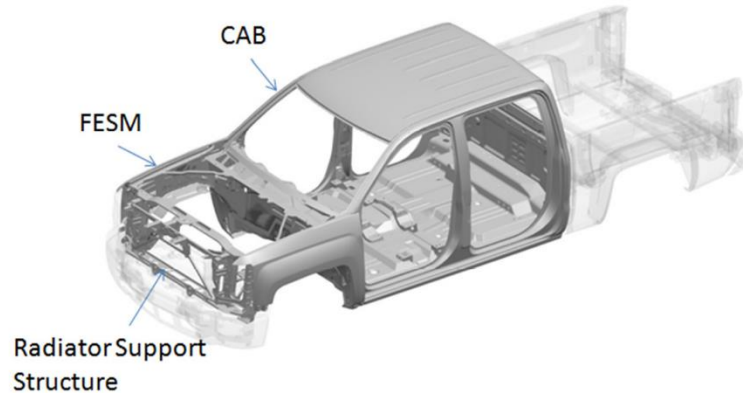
Baseline Chevrolet Silverado 1500 Cab Assembly
